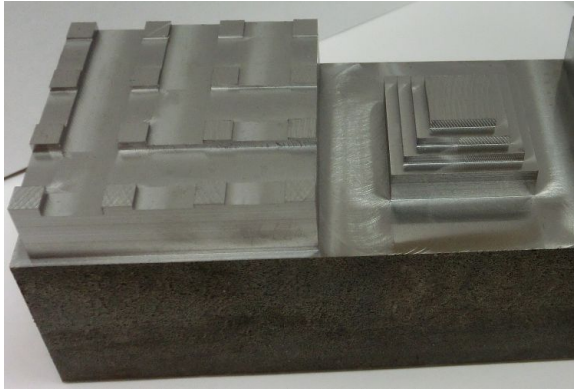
Final part after completing the machining tests. Both geometries were machined from the same test block
